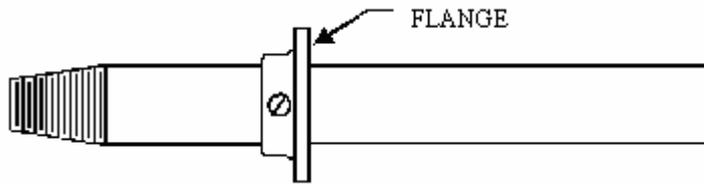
PROTECTING TUBE WITH MOUNTING FLANGE
